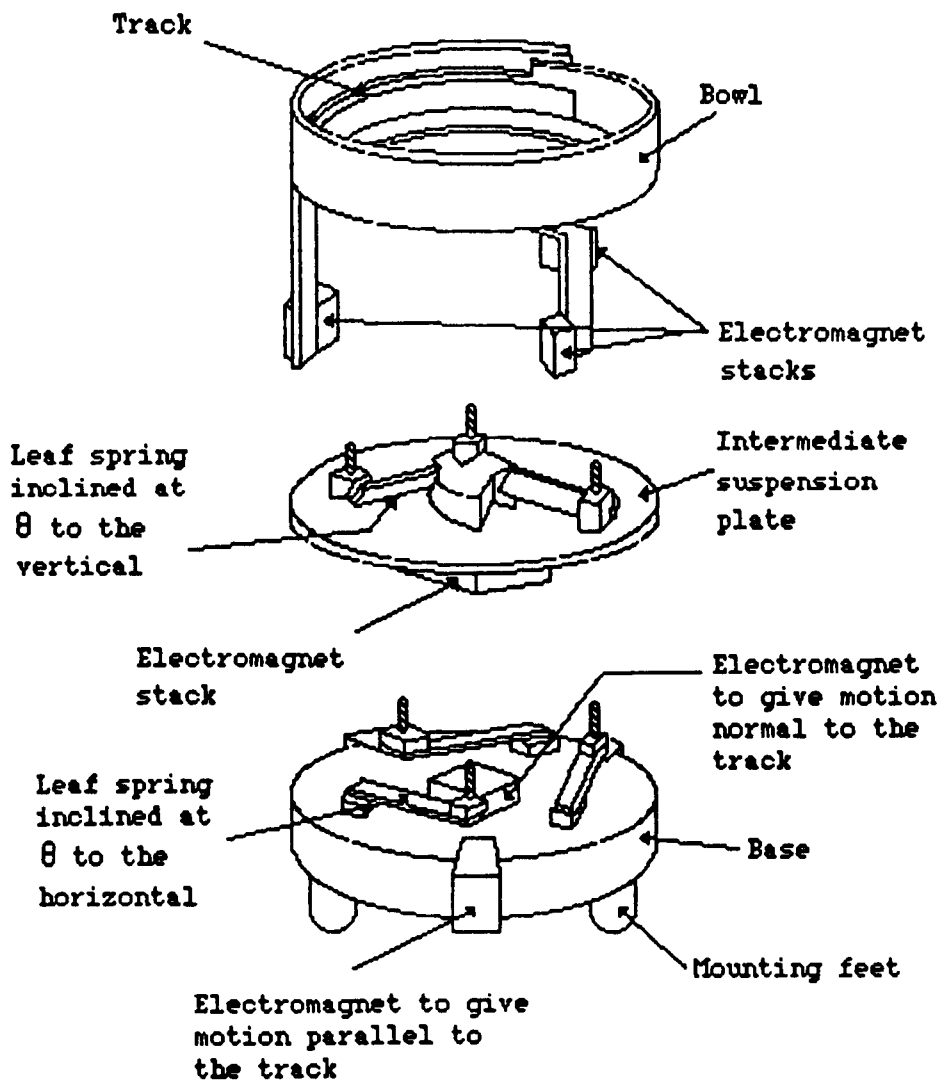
Exploded view of an out-of-phase vibratory bowl feeder
